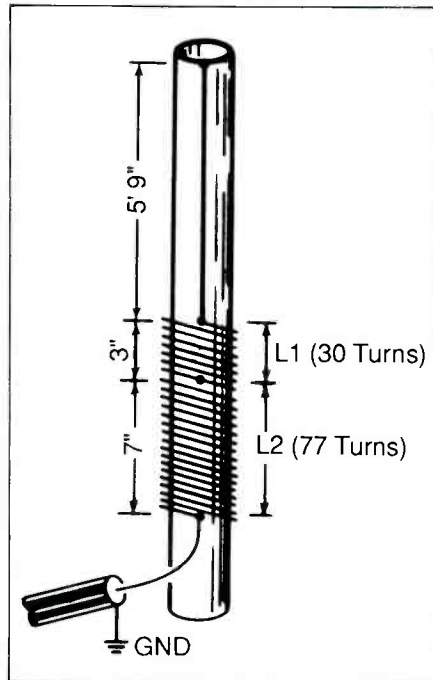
Loading coil assembly. Coils are tapped as per instructions.
